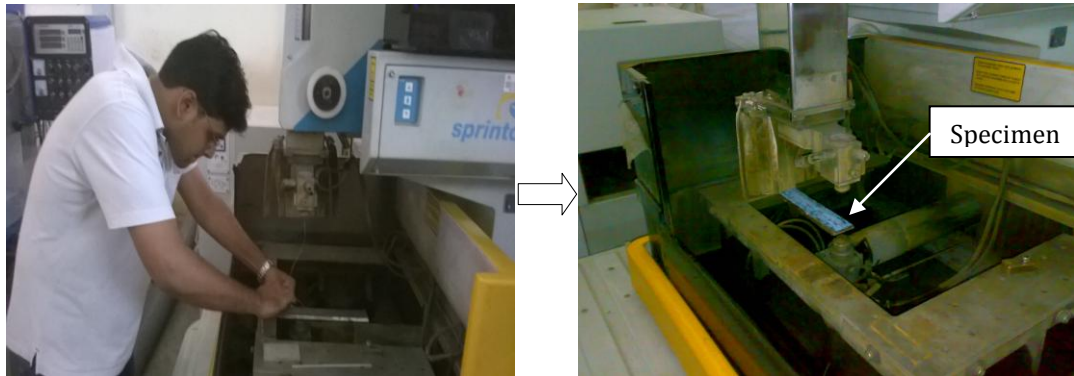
Adjustments and fixing of specimens inside EDM machine
